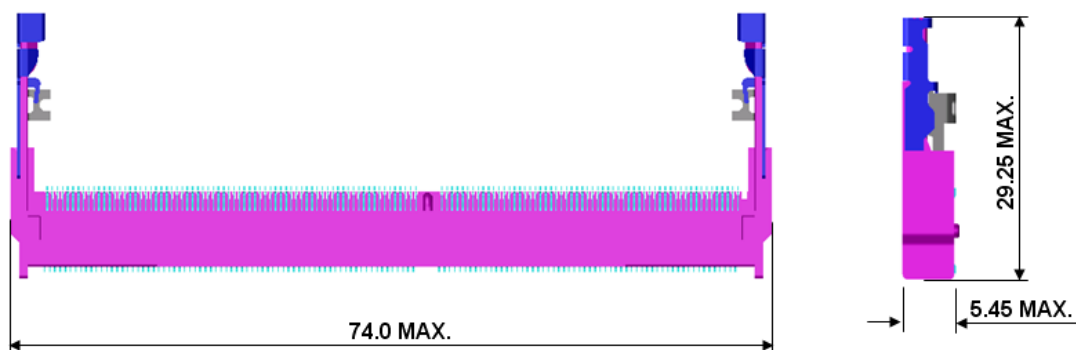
SODIMM DDR4 Surface Mount (SMT) Connector Socket Outline
